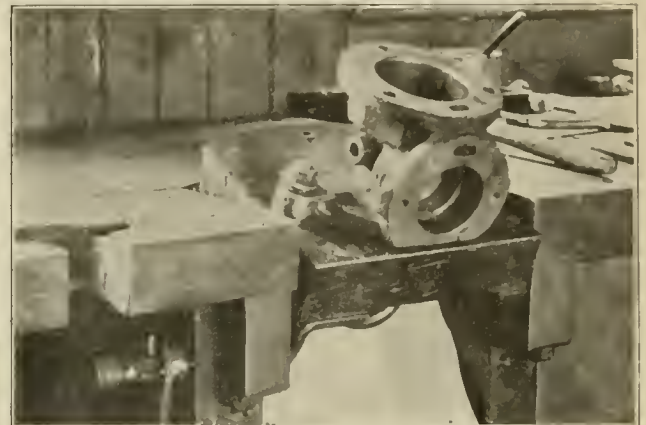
TRIPLE VALVE TILTED FORWARD.
